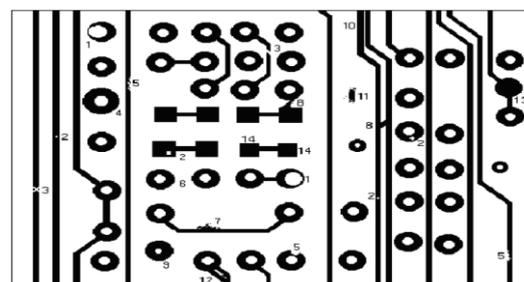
(B): An Example of Defective PCB Patterns
